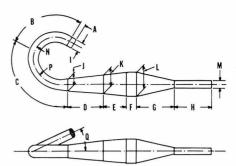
Drawing of expansion chamber suggested. Refer to text for dimensions.
